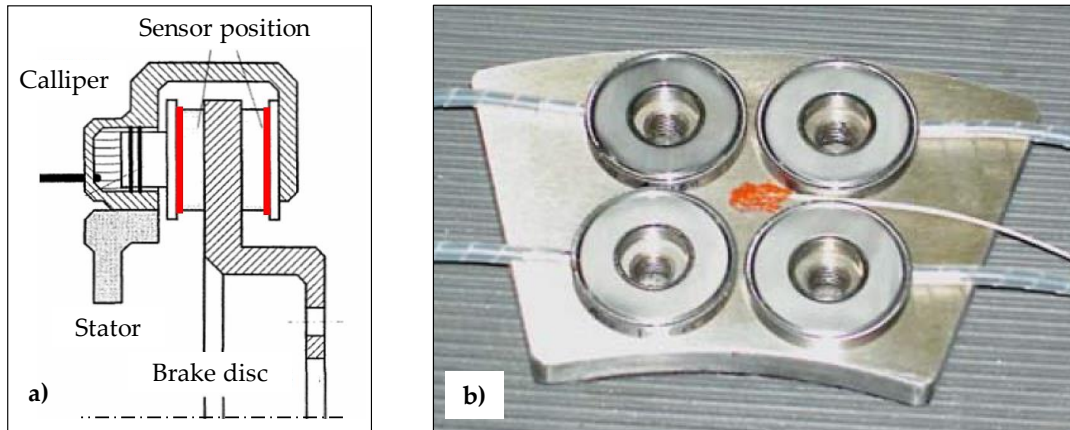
Piezoelectric transducer based brake force measuring system to detect one force component: a) Integration of the sensors in the brake [40], b) Position of the sensors on the friction material [40]
